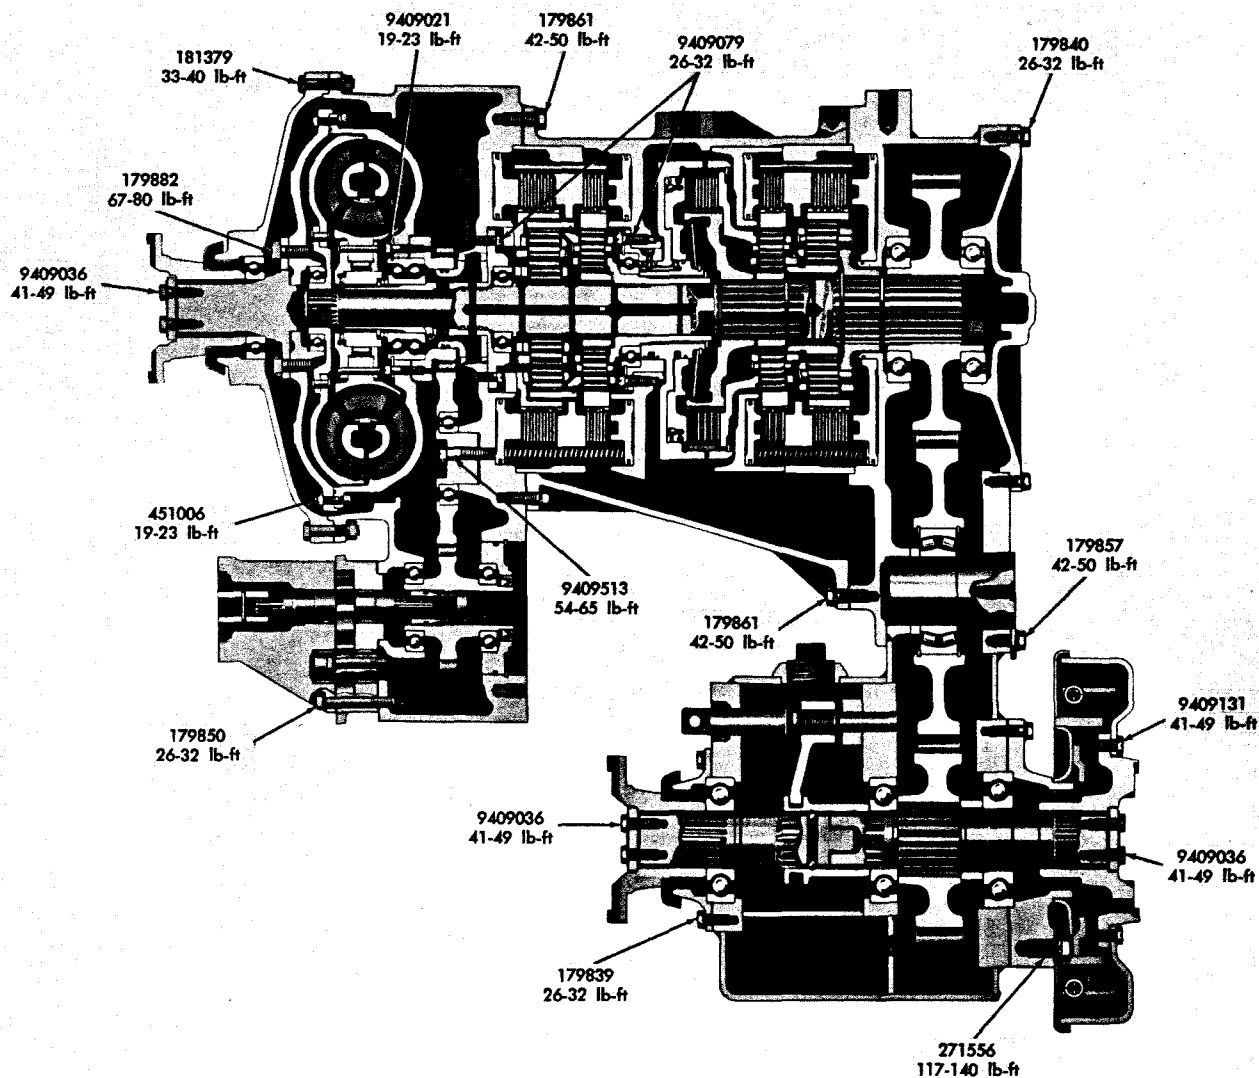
Model CRT 3531-1 (or CRT 3630-1) transmission, showing torque values—cross section
